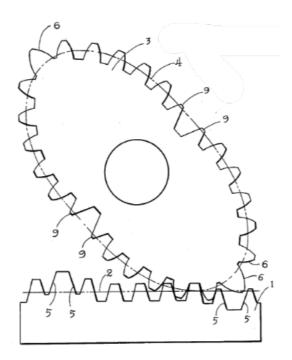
illustrates a toothed gearing including non-circular gear (3).
